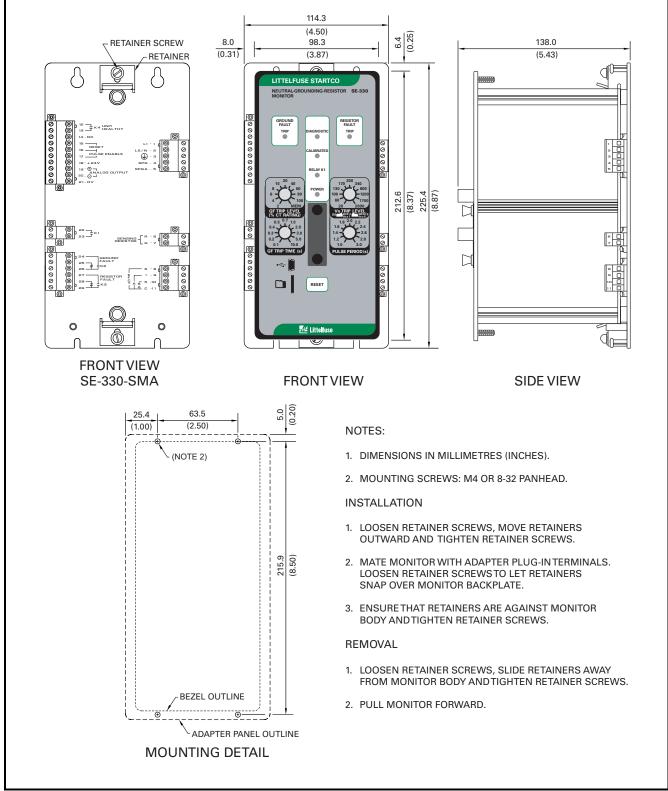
SE-330 Outline and Surface-Mounting Details.
